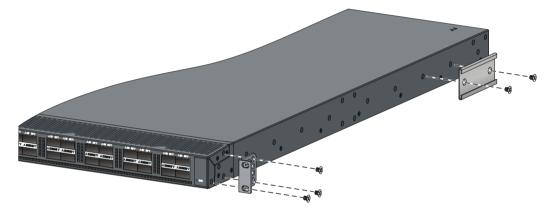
Attaching the mounting brackets and chassis rails to the HPE 5940 2-slot switch (power supply-side mounting position for the mounting brackets)
